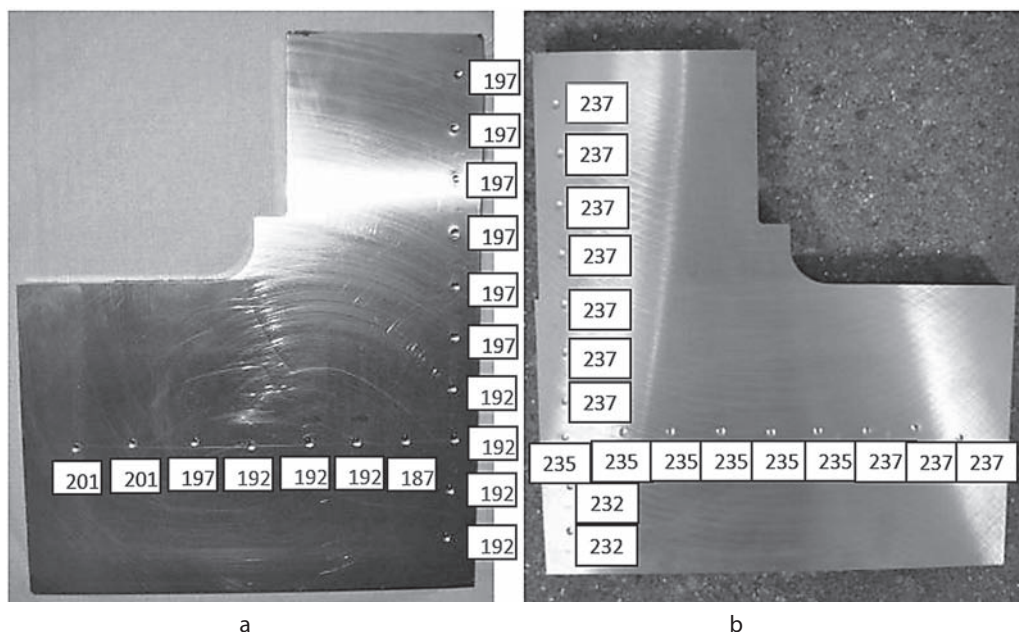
Determination of Brinell hardness for the piece of flange end type : a - sample plated by welding without ultrasonic activation; b - sample plated by welding in ultrasonic field.
